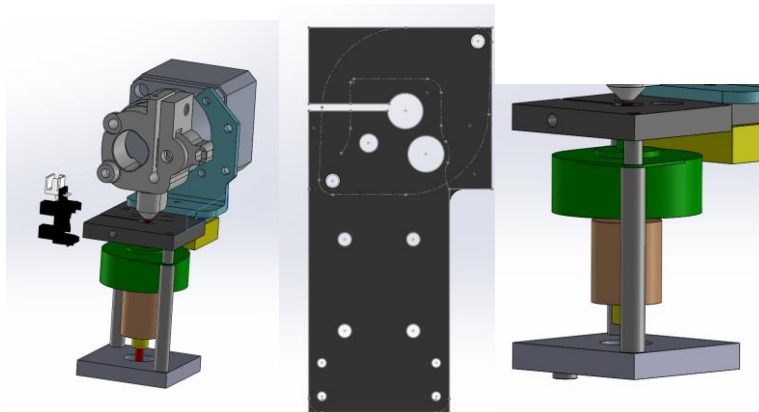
CAD Design of all-metal nozzle assembly. Left: Complete assembly. Middle: Carriage mount with flexure based on original M2 mount plate. Right: Closeup of support assembly to add rigidity near nozzle tip
